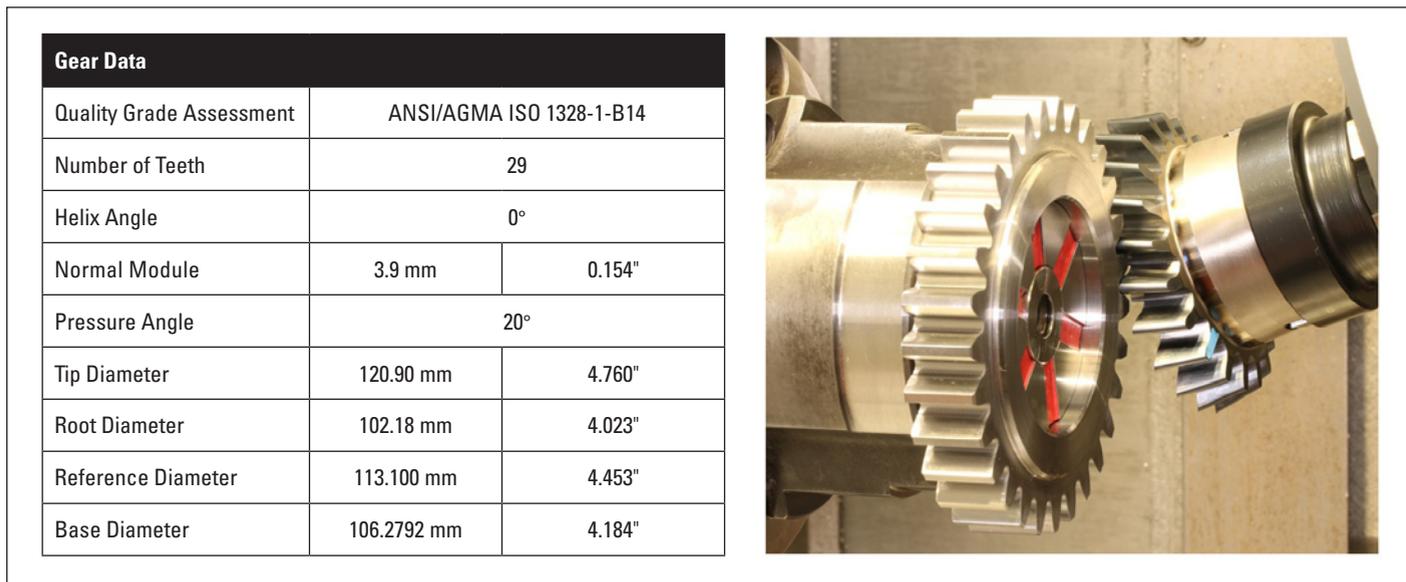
Pulsator gear table (left) and geometry with gear skiving tool (right).
